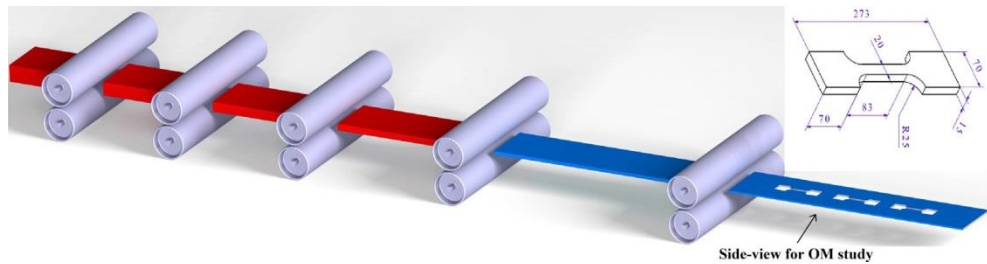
Schematic of rolling process after casting and the dimension of tensile test samples.
